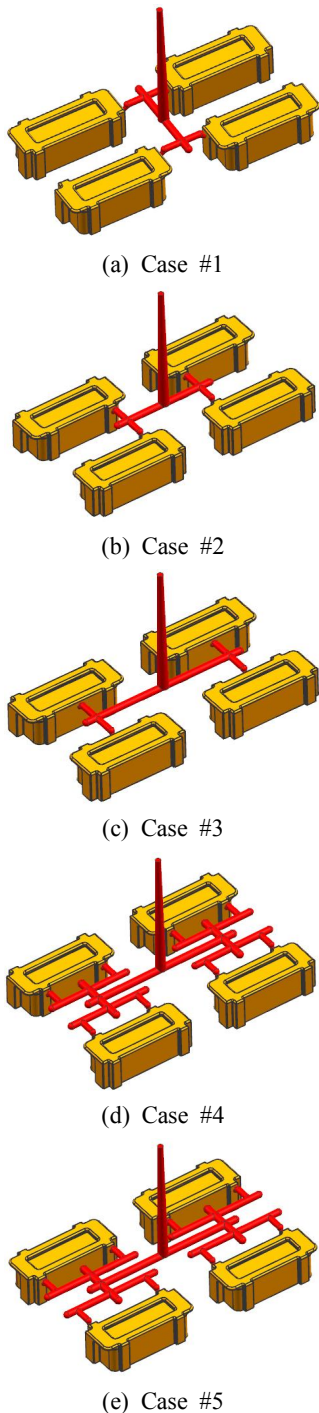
Five design alternatives of TCC multi-cavity mold layout
